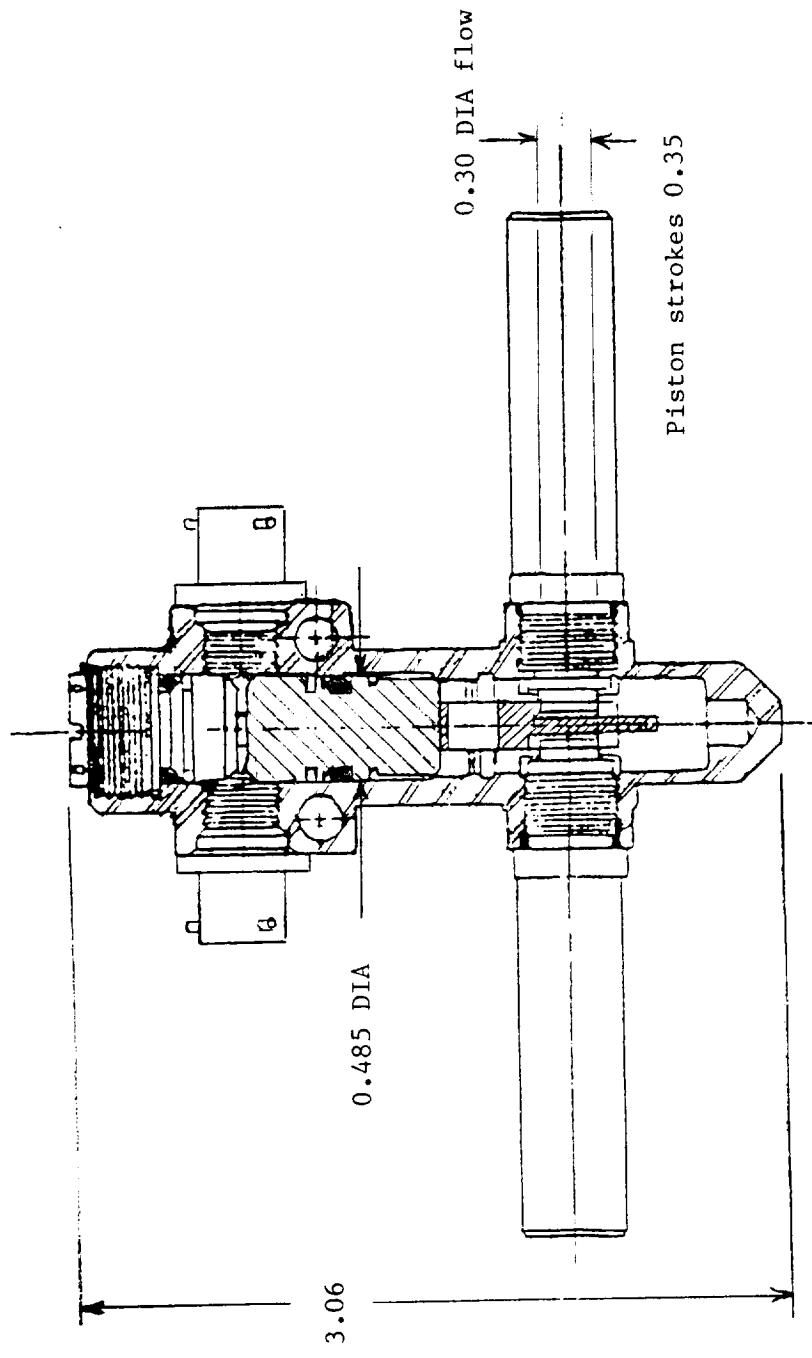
Cross sectional view of Quantic pyrovalve. The body and fluid fittings are stainless steel.
